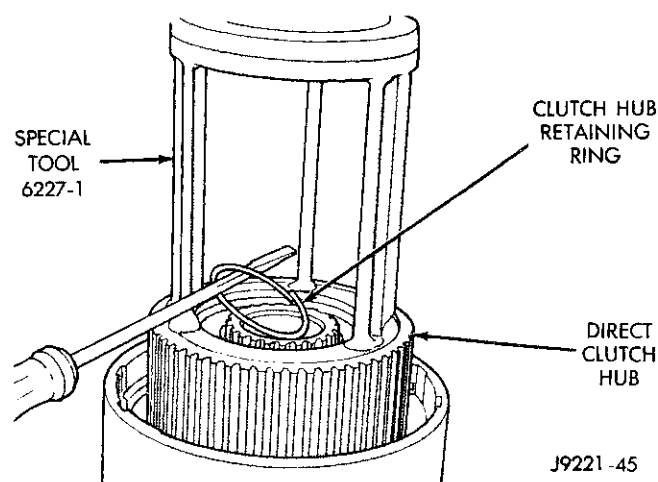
Removing Direct Clutch Hub Retaining Ring
